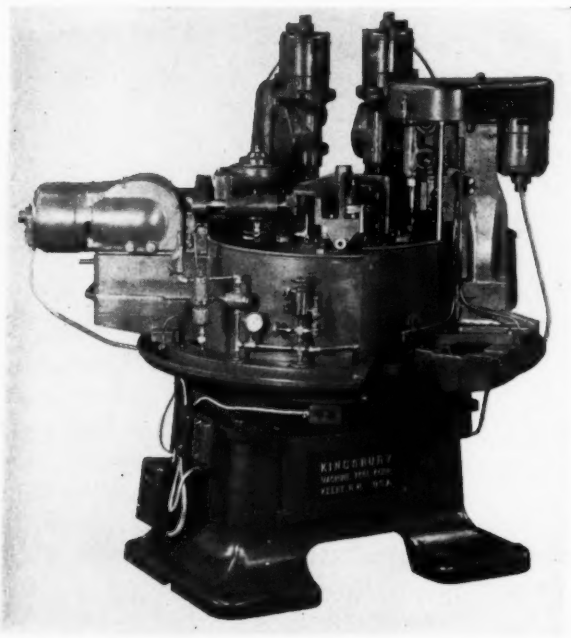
Driven elements of the machine can be connected directly to the motor by the use of flange mountings
